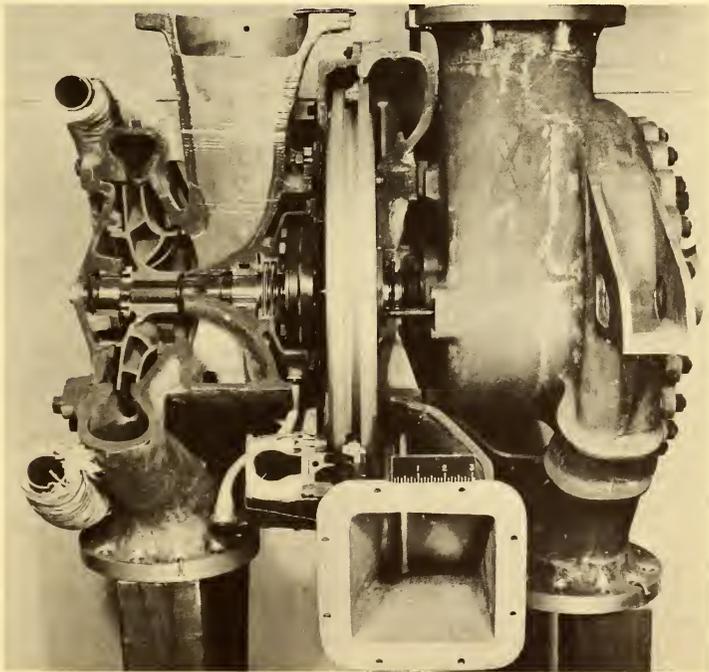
Cutaway View, V-2 Turbopump Assembly
